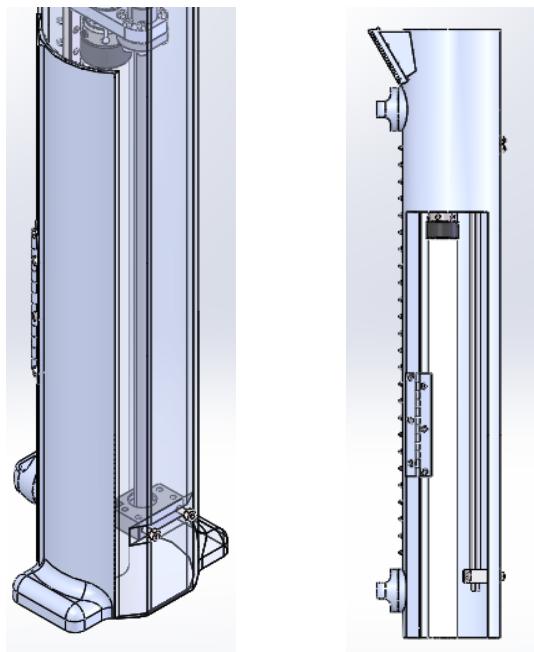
Left: Isometric view of door on chassis, where the door is opaque while the chassis is transparent. Right: Side view of door opening. The drill head is easily accessible by the user.
